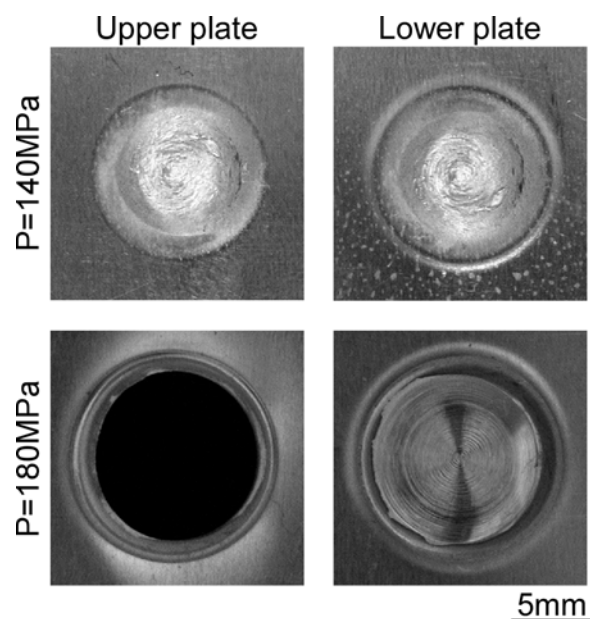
Appearances of tensile shear tested specimens of friction spot welded joint. (t=1.0s)
